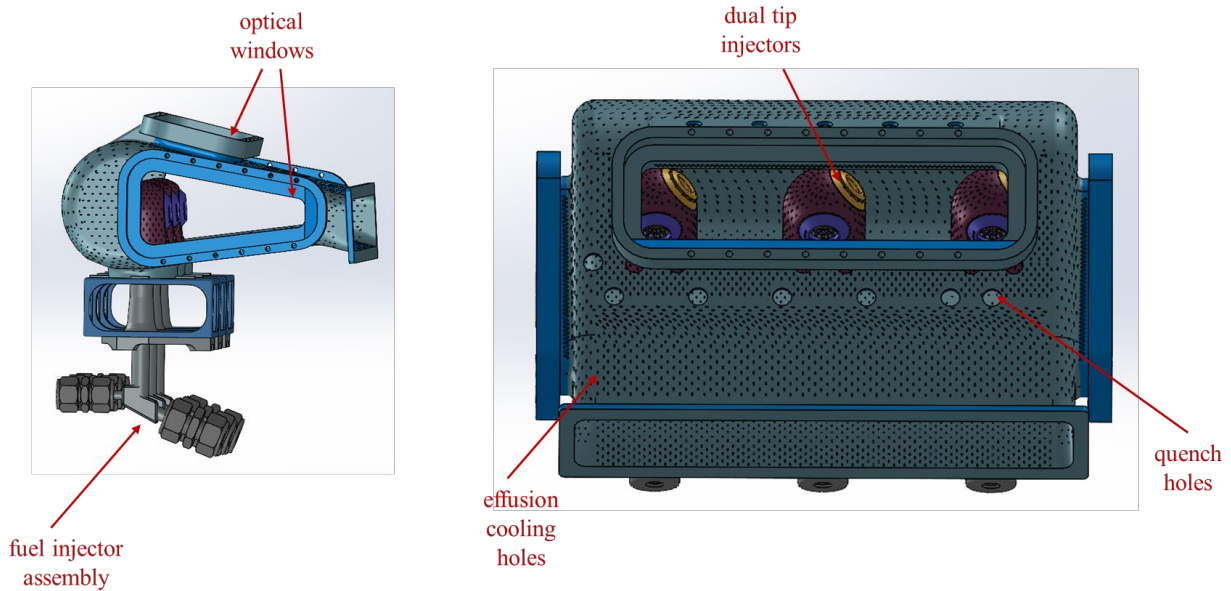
CAD design of the sector combustor with fuel injector assembly.
